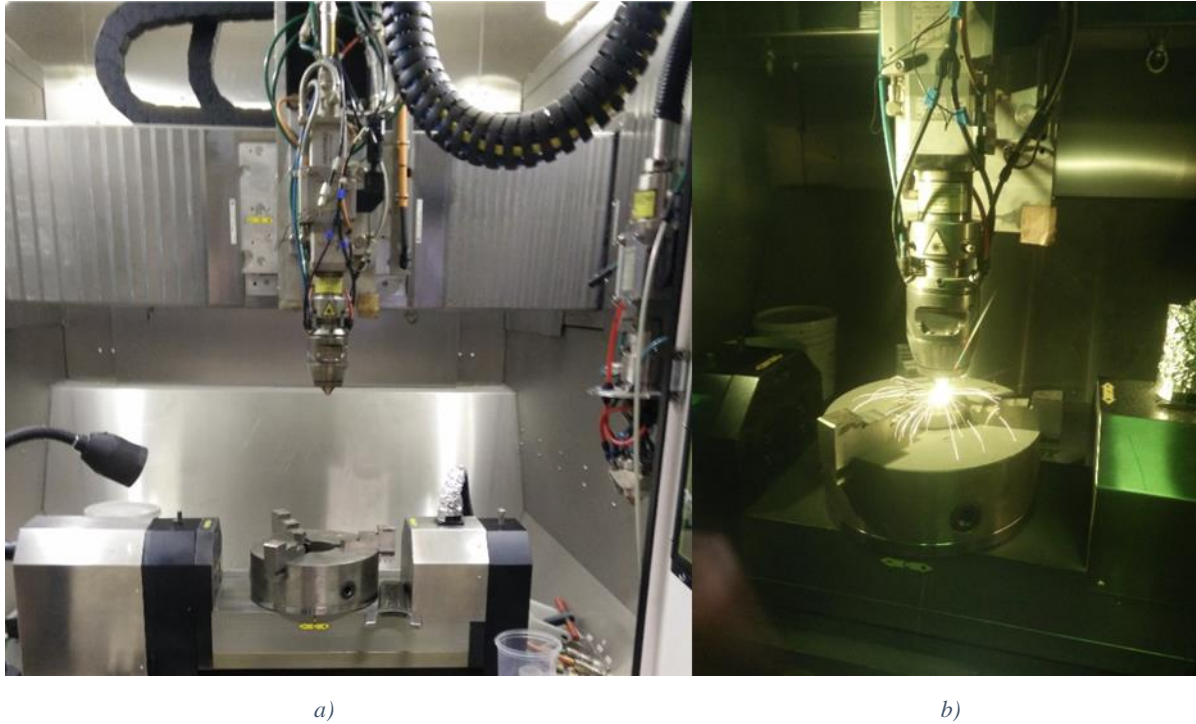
a) Internal view of the Cladding machine; b) DUOCLAD VI LF 2000 while it is working.
